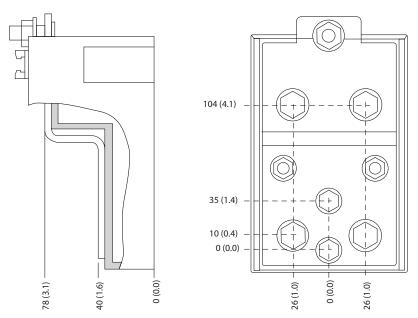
Detailed Terminal Dimensions for E1/E2
